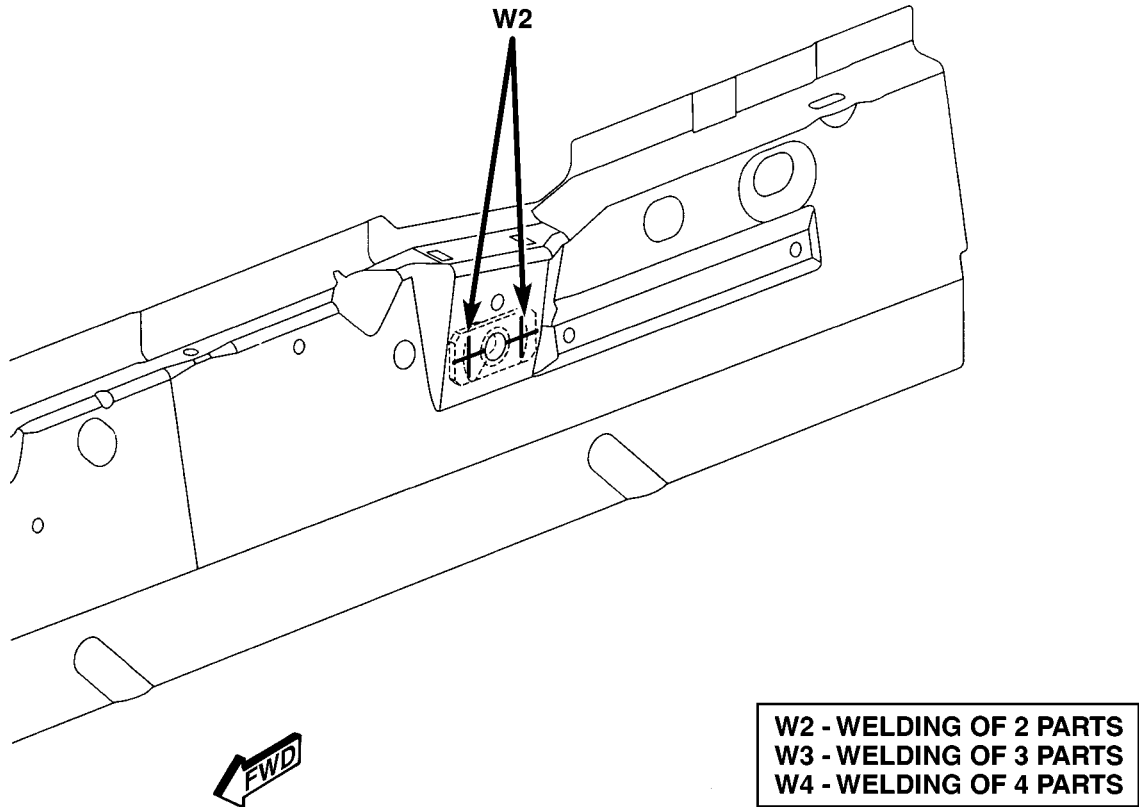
FRONT SEAT BELT ANCHORAGE TO INNER BODY SILL
